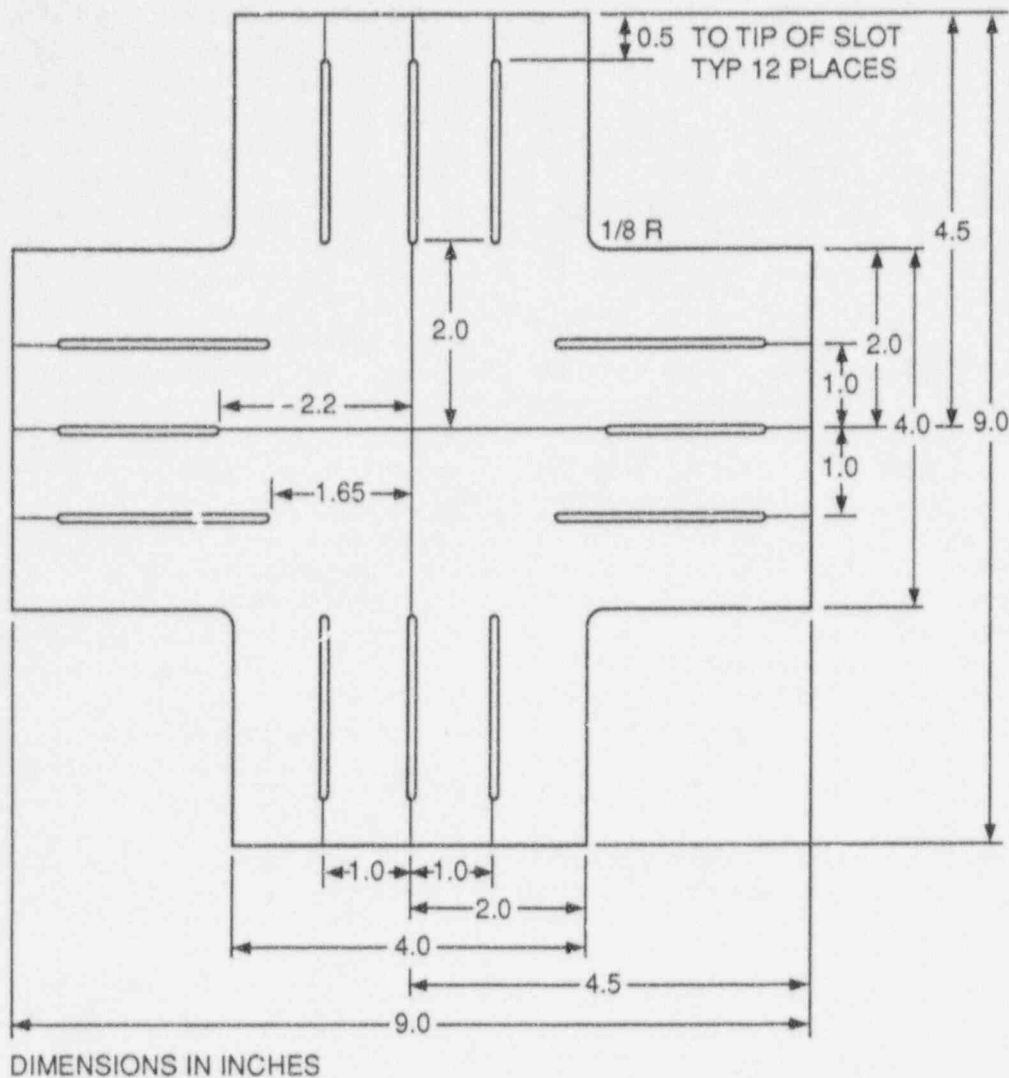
Schematic of modified test section for cruciform beam specimens
